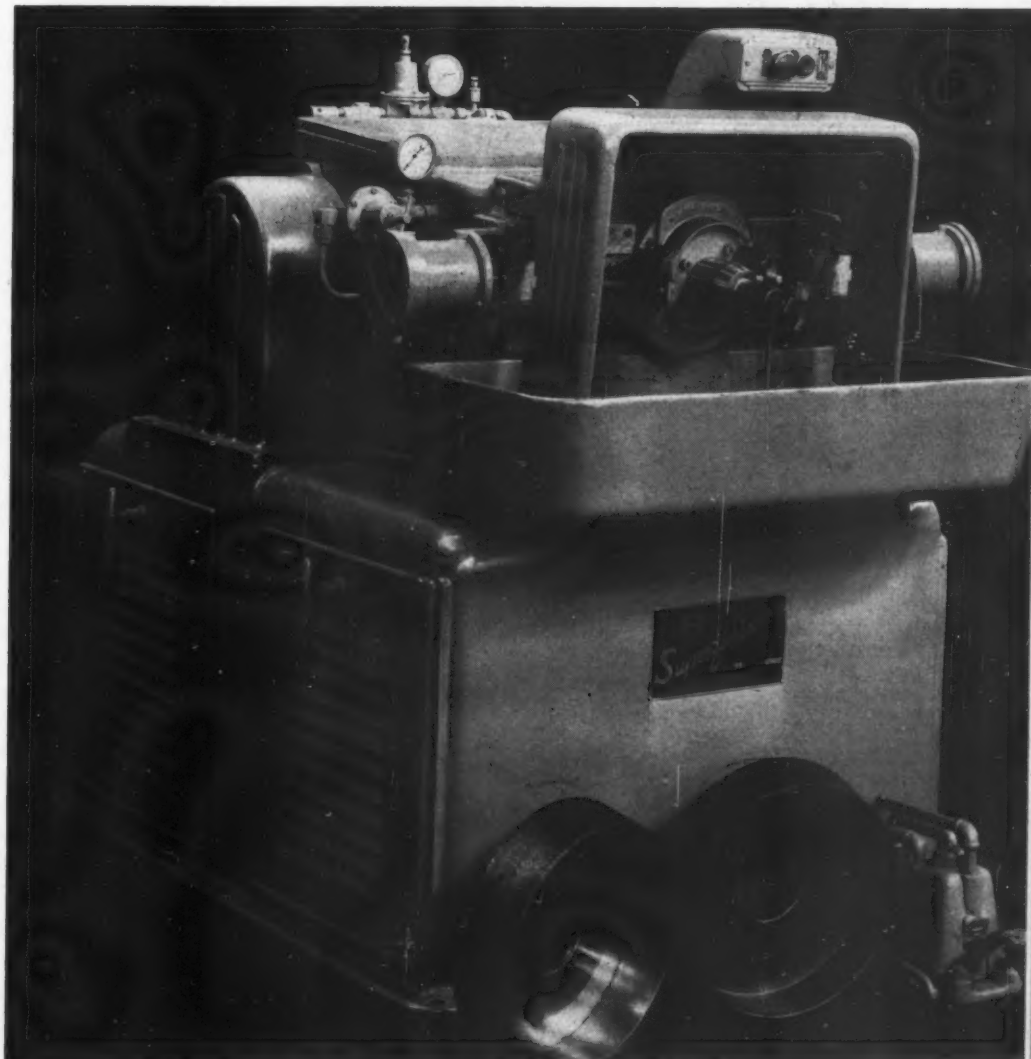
Above Right—Nine-spindle machine for flat and spherical work. Surfaces reduced to about 2 microinches at average rate of 800 to 900 pieces /hr
